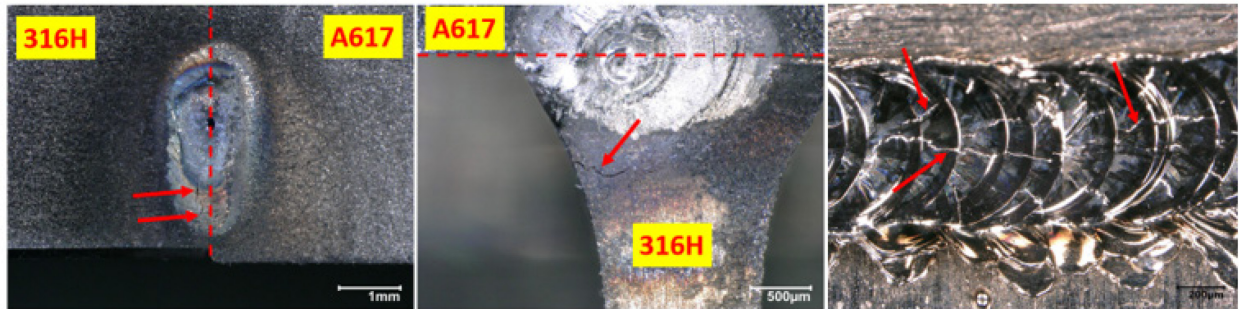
The solidification cracking observed in the WFSTA version 1 welding trials.
